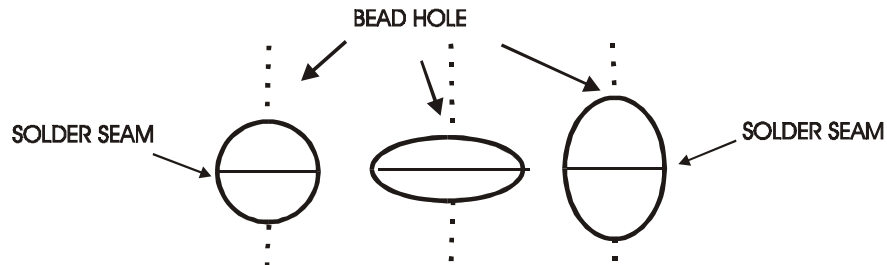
Conventional Domed Bead. The bead holes are at the top to bottom and the solder line is through the middle.
